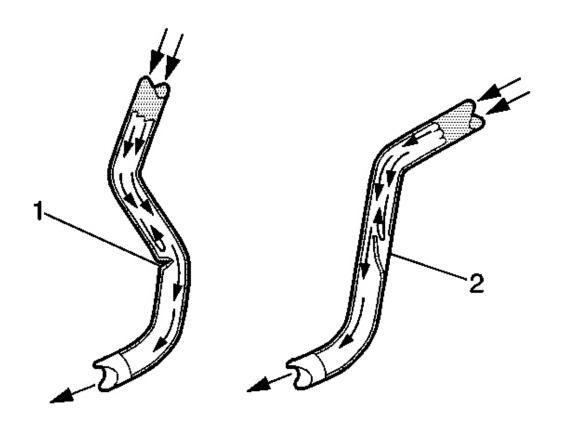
Identifying Flexible Brake Hose Failure Conditions Courtesy of GENERAL MOTORS CORP.
